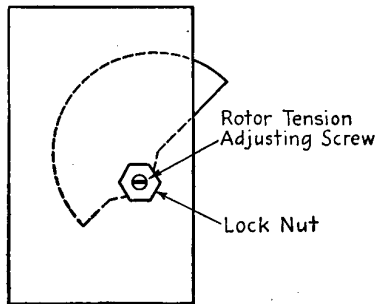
Rear view of tuning condenser, showing rotor tension adjustment.
